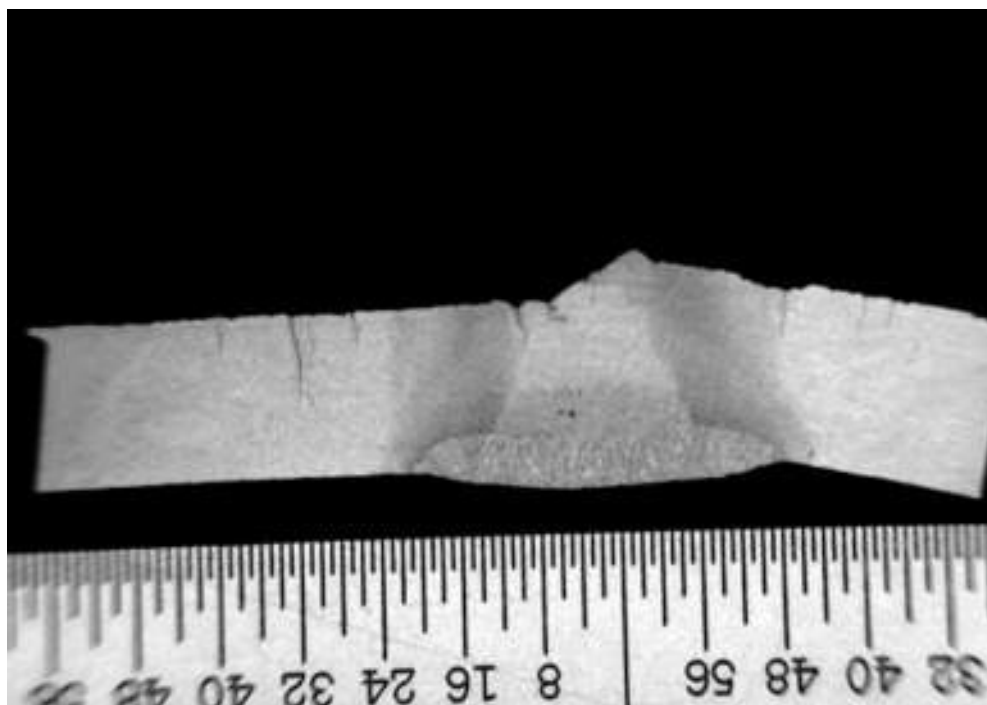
A weld from a 4-in. (100 mm) ASTM A53 reflux line on the main fractionator that leaked after 52 years of service.
